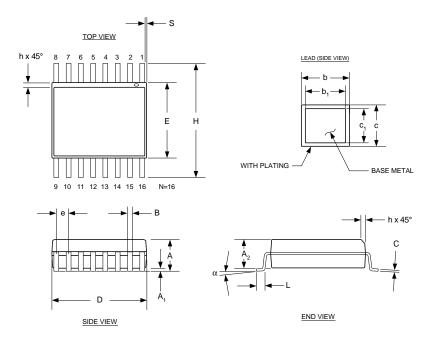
Package Outline Drawing SSOP16, 150 MILS
